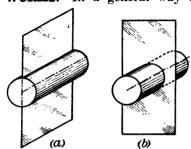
Section Planes: (a) An Axial Section Plane, (b) A Normal Section Plane
